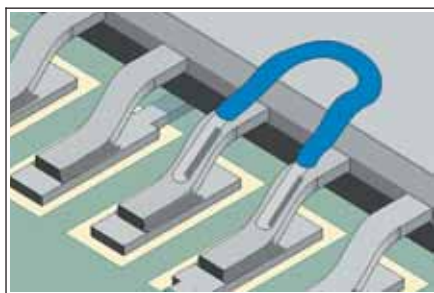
Acceptable Wire looped and soldered to adjacent component leads.
